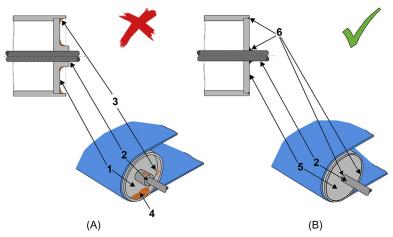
(A) Pressed-in roller ends (1) create dead areas and crevices (3), where residues of product and soil (4) may accumulate. (B) Flush roller ends (5) which are properly welded (6) to the roller and to the shaft (2) avoid any hazard and can be cleaned easily (CFPRA, 1983; Hauser et al., 2004b).
